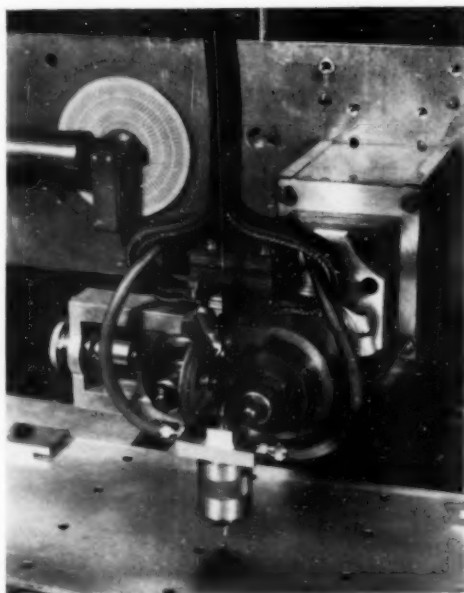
The E.R.A. welding head for investigations on the self-adjusting arc process.
